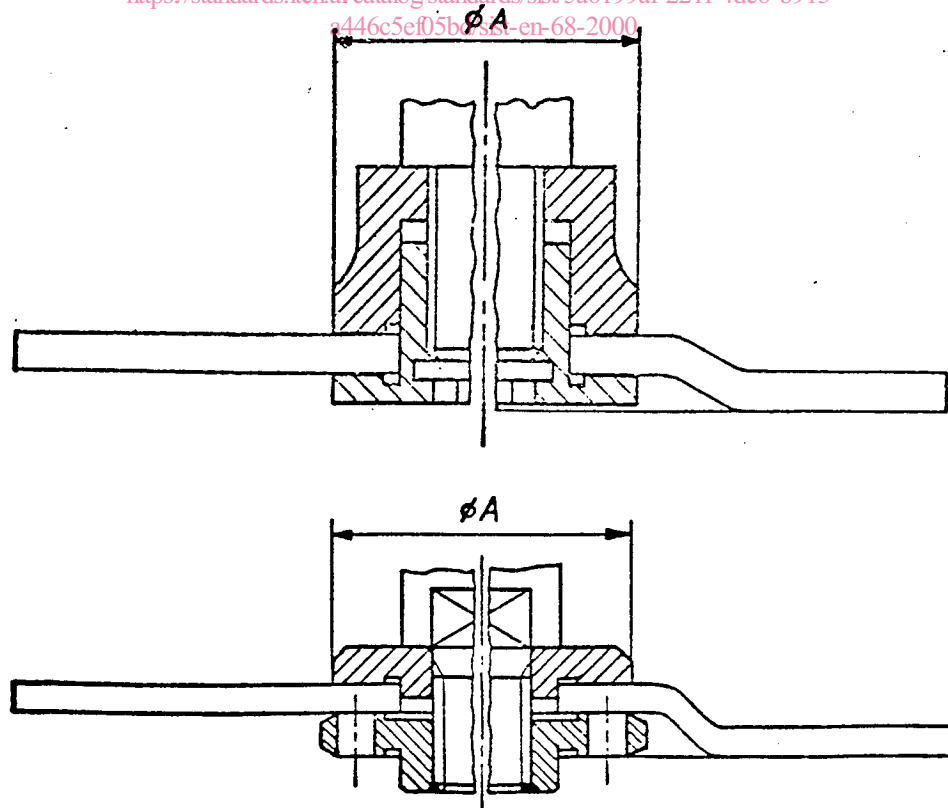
Examples of flange assemblies for reinforced depressed-centre and cutting-off wheels (for dimensions see table 5)
